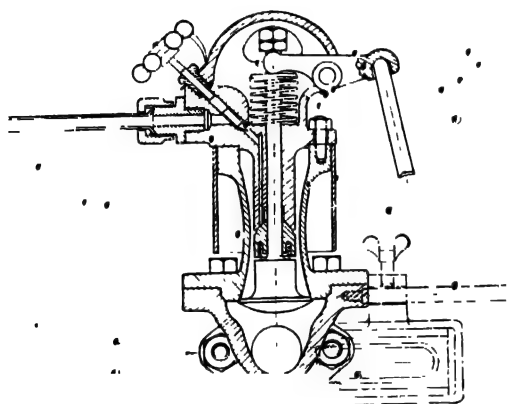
Ruston-Proctor Engine. Inlet Valve
